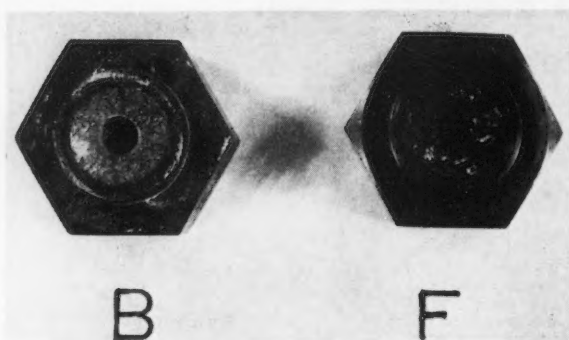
Top view on fracture surfaces of Type 316 stainless steel nuts B and F.
